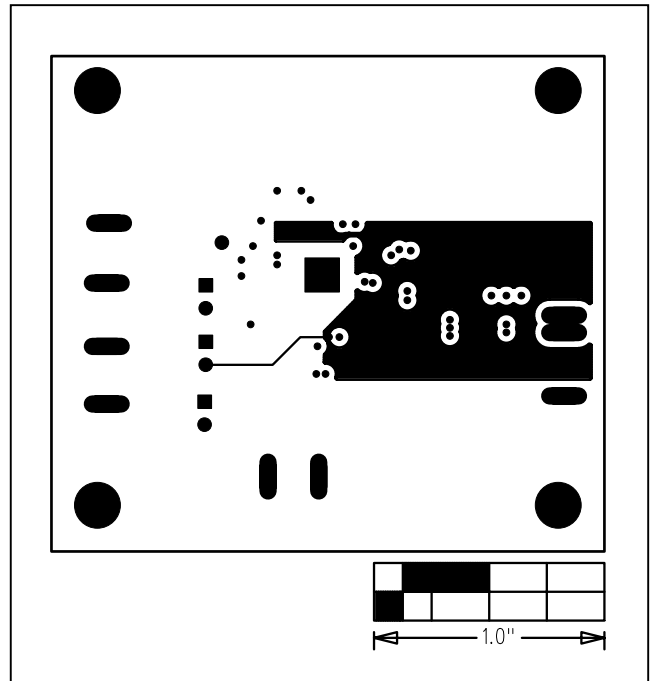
MAX15015A EV Kit PCB Layout—Power Layer 3
